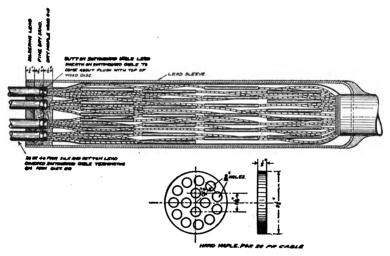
Method of Splicing Underground and Distributing Rack Cable.
